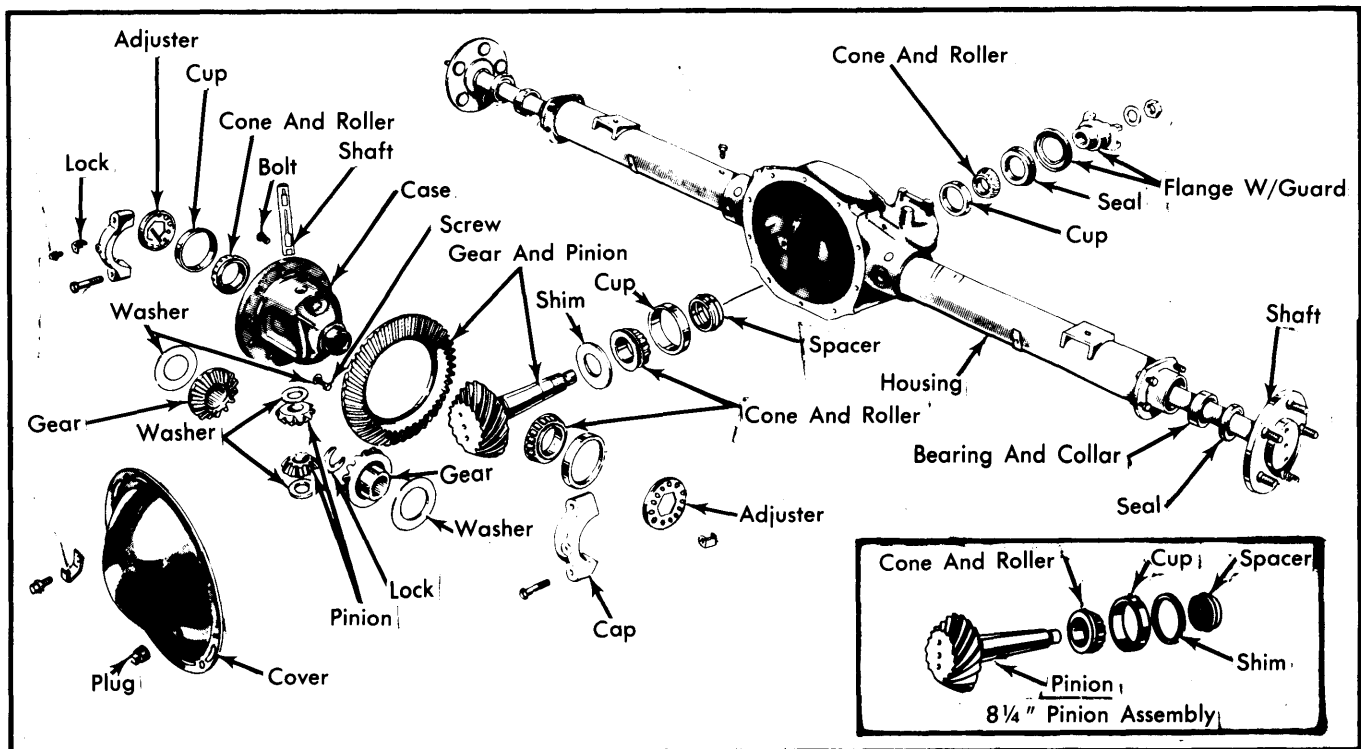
Exploded View of Chrysler Corp. 8 1/4" and 9 1/4" Rear Axle Assembly
